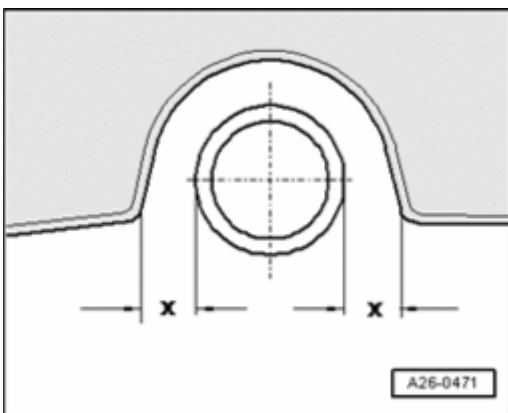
Checking Distance Of End Pipes At Left/Right To Bumper
